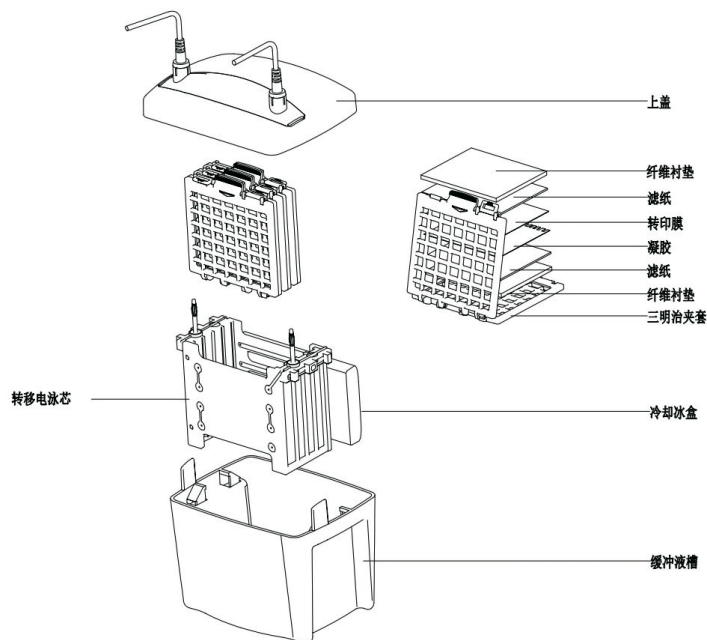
L-VET-TRANS4 cell and component assembly (exploded view)
